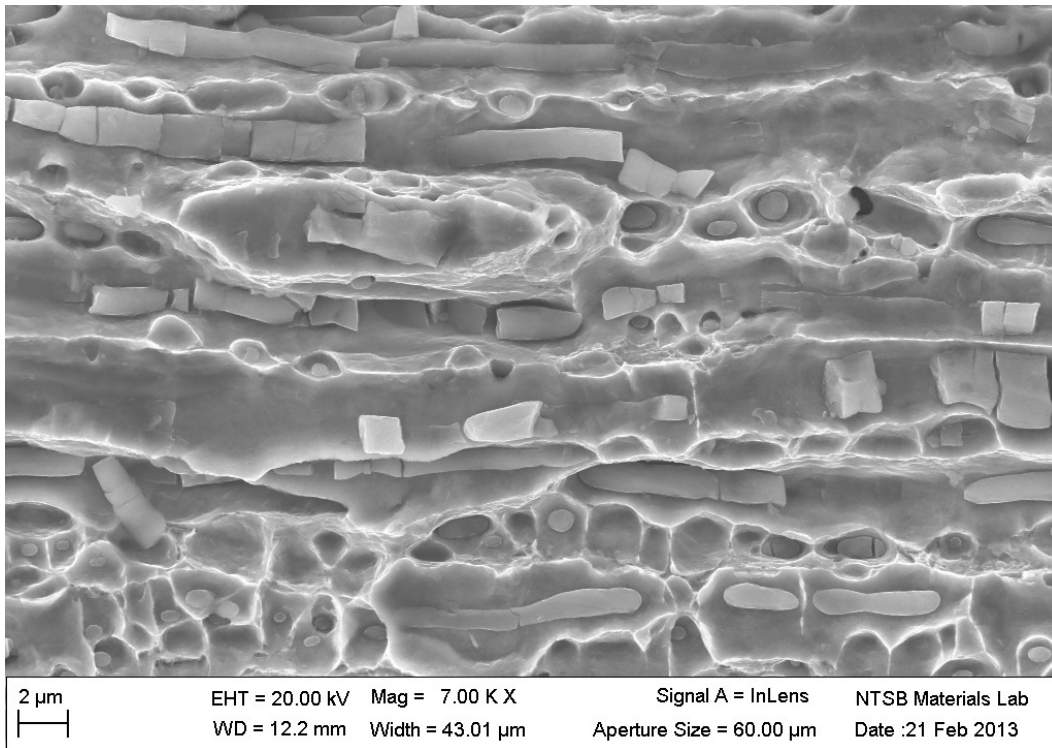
SE micrograph showing dimple rupture, indicative of overstress, on the output gearshaft fracture surface.
